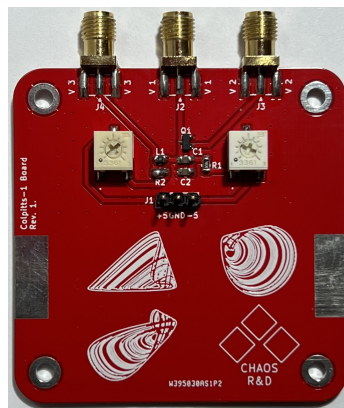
Fabricated Colpitts Chaotic Oscillator PCB Prototype.
